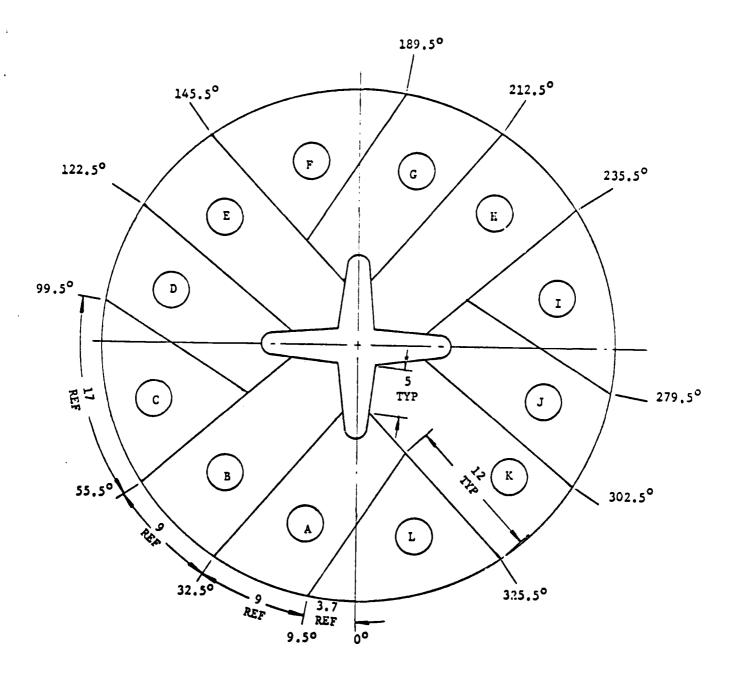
Section 3 and 4 Segment Layout and Letter Identification
